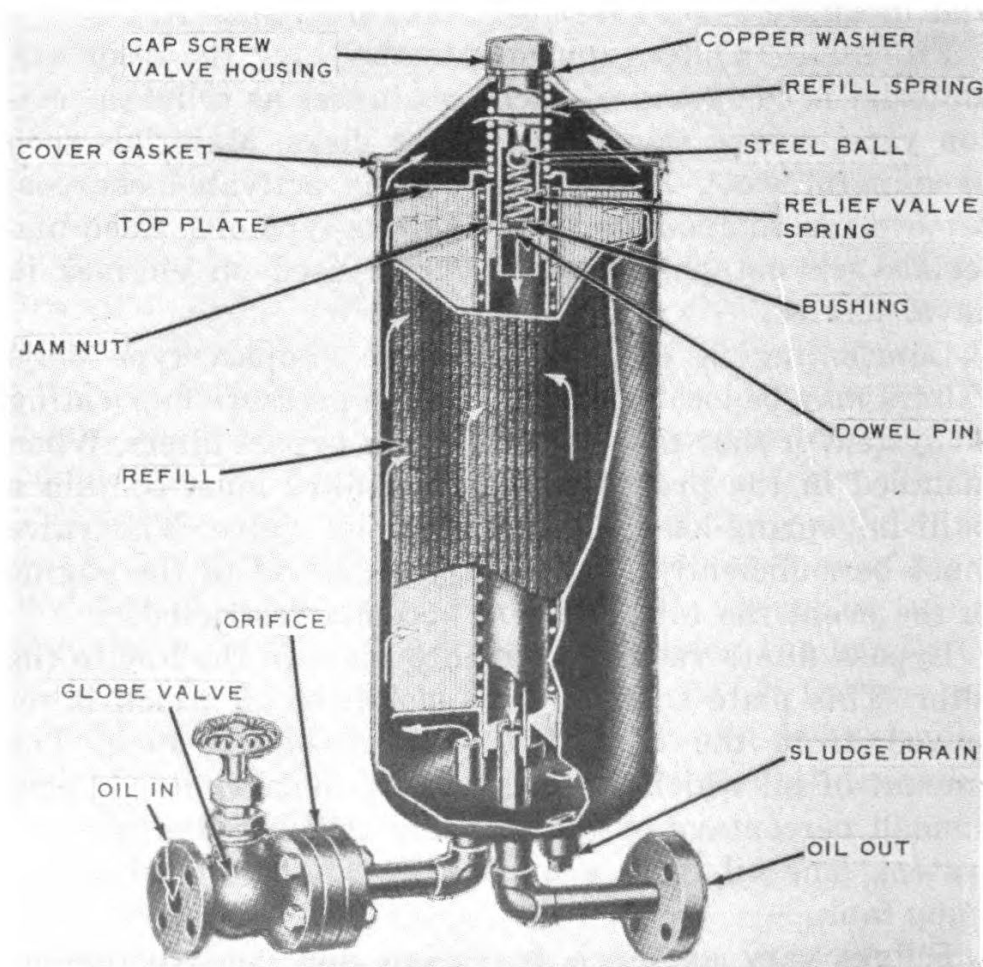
A single-unit type lubricating-oil filter (GM 268A).
